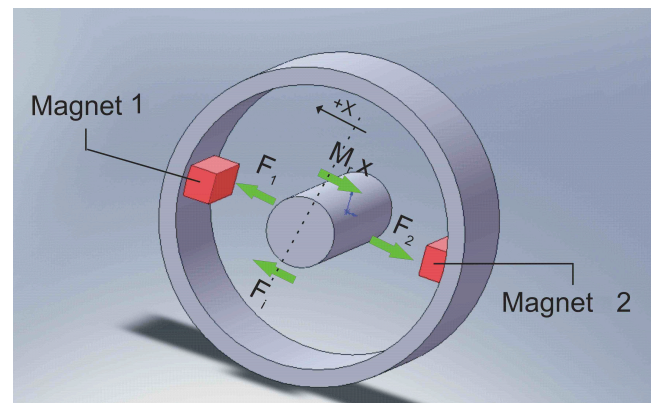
Layout of a controlled shaft using a radial magnetic bearing.
